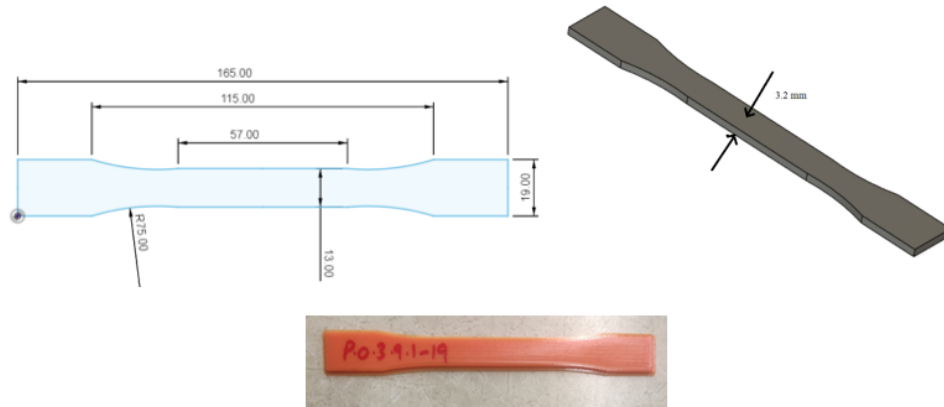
6 ASTM D638 Type I design, designed tensile specimen and final 3D printed tensile specimens
